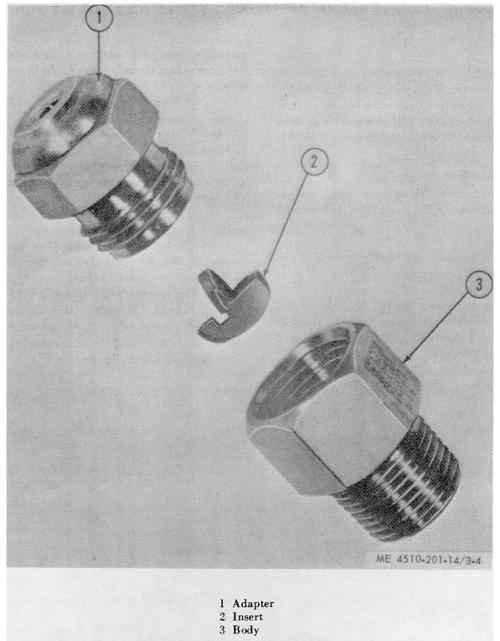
Shower head nozzle (used on Army models SPE 35 and SPE 35A) disassembled.
